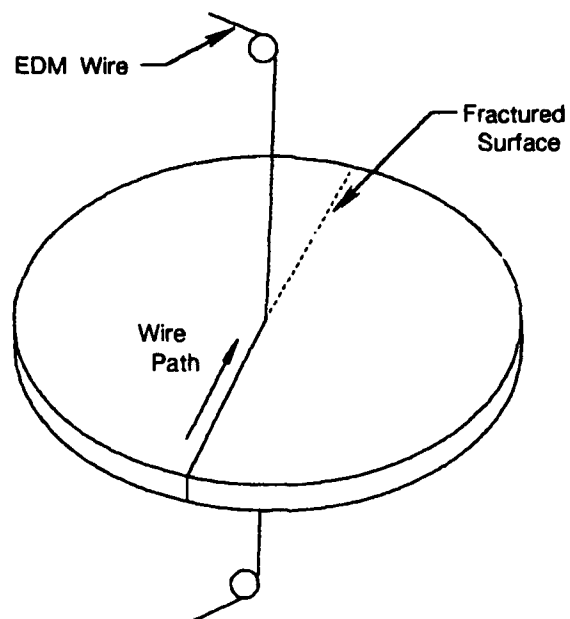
Schematic Diagram of EDM Wire Path and Pancake Fracture. Pancake Fractured When Wire Cut Reached Pancake Center
